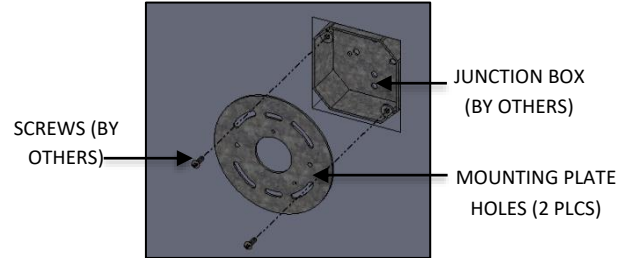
MOUNTING PLATE ASSEMBLY TO J-BOX (BY OTHERS)
